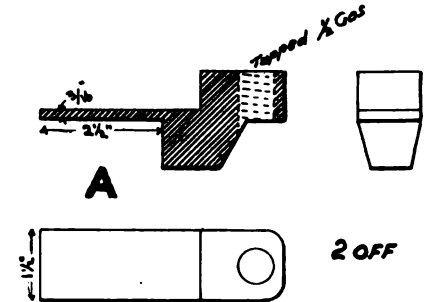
DETAILS OF BRACKET FOR CARRYING FRAME.
